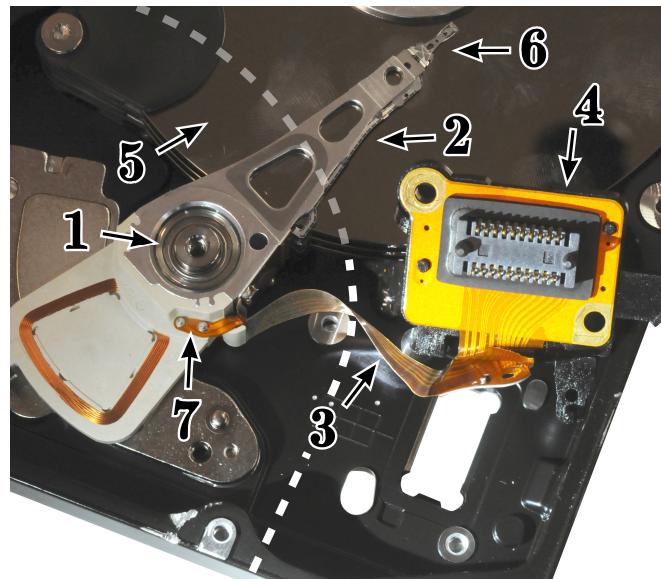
A multi-platter hard drive after removing cover and detaching circuit board (4). Top magnet is removed. Base plate can be cut along dashed line.
